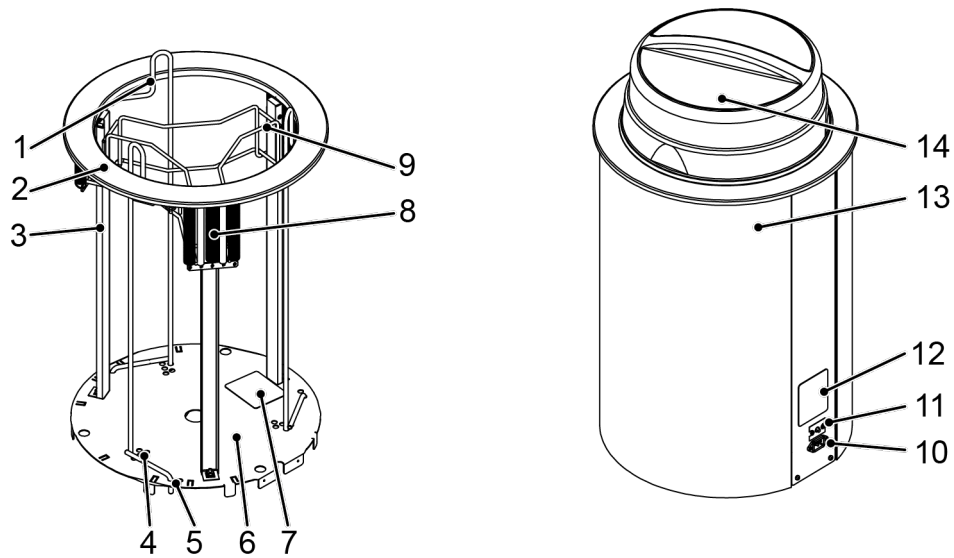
example of an incounter plate dispenser, standard version and heatable
